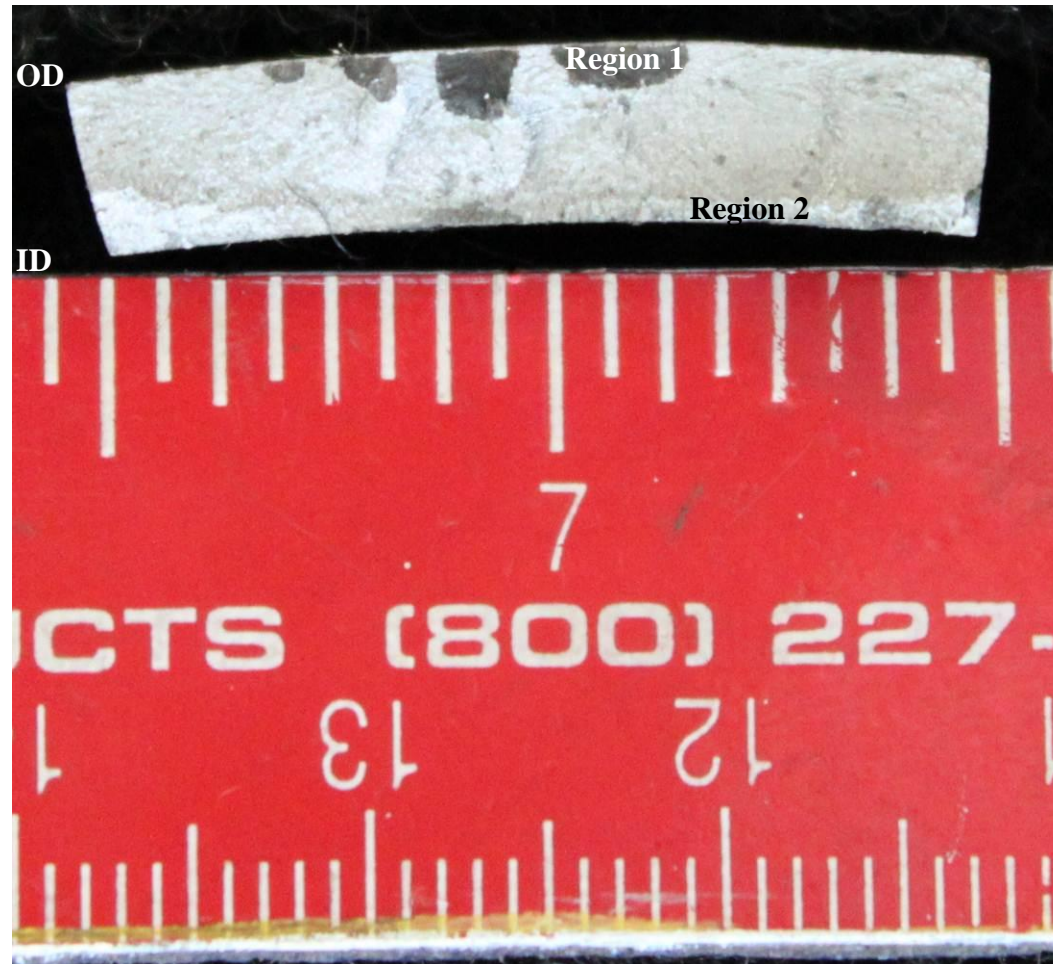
Photograph of the fracture surface from Crack Colony 4.
